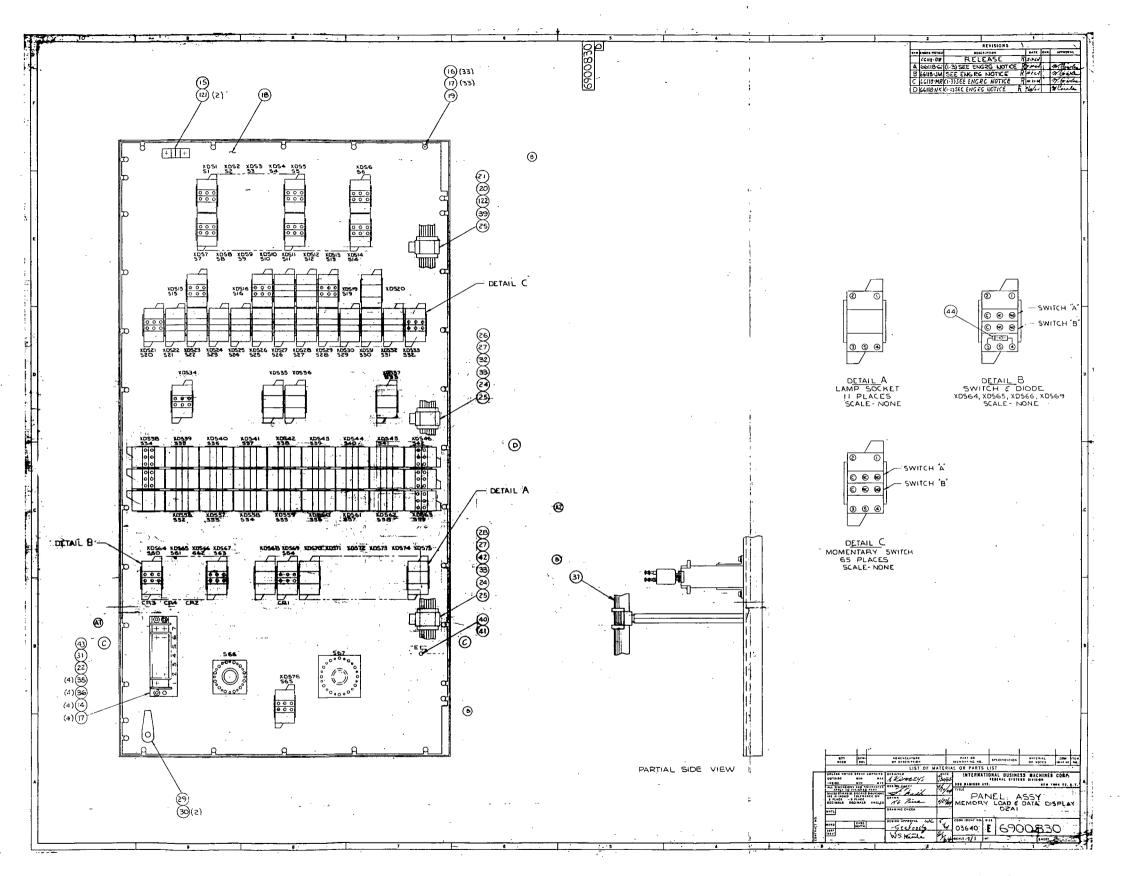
Memory Load and Data Display Panel Assembly (02A1) Assembly Drawing (Sheet 2)
